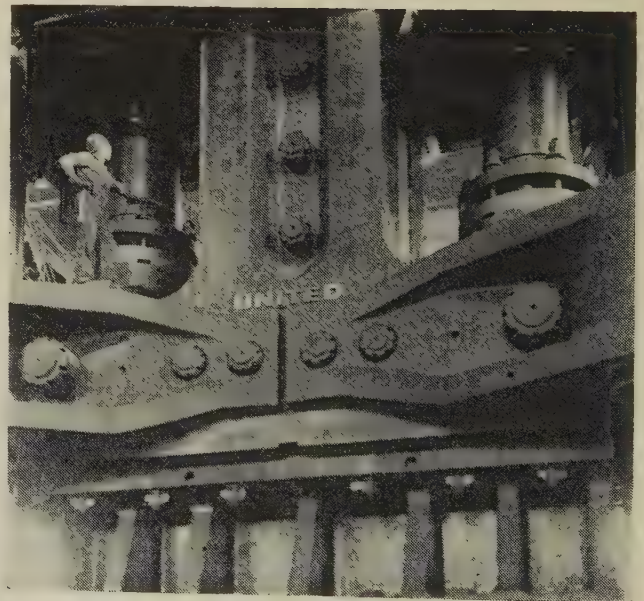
CLOSE-UP OF CROSSHEAD OF 14,000-TON PRESS
